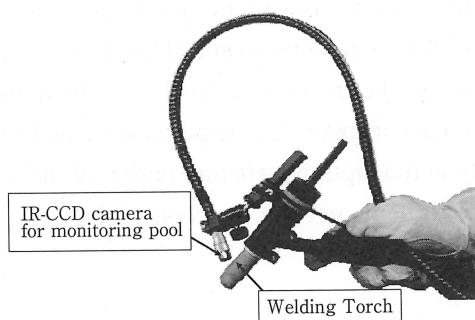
Appearance of the welding torch with IR-CCD camera
